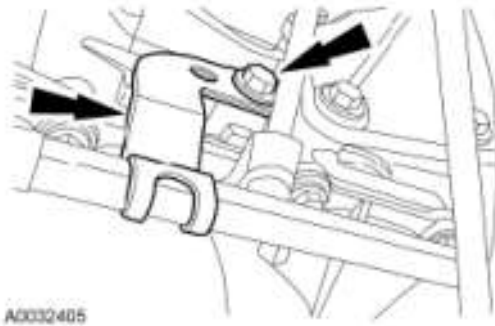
Locating Transmission Cooling Tubes Retaining Bracket
